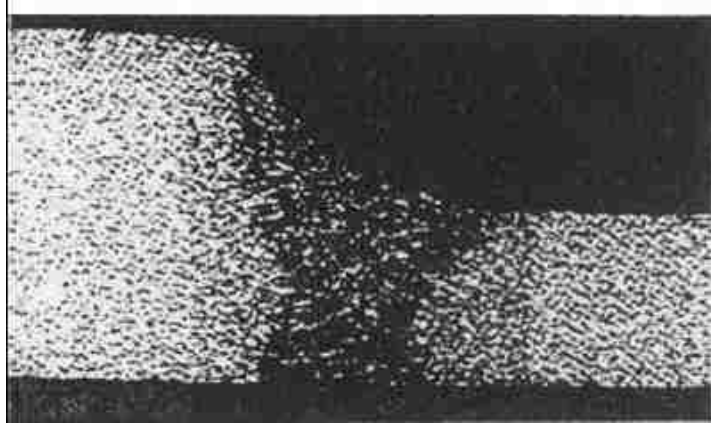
The hourglass shape of the weld pool for different thickness. [1]
